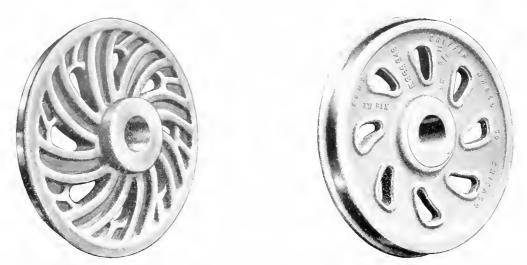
Cast Steel Plate Center, Held by Shrinkage and Shoulder.
